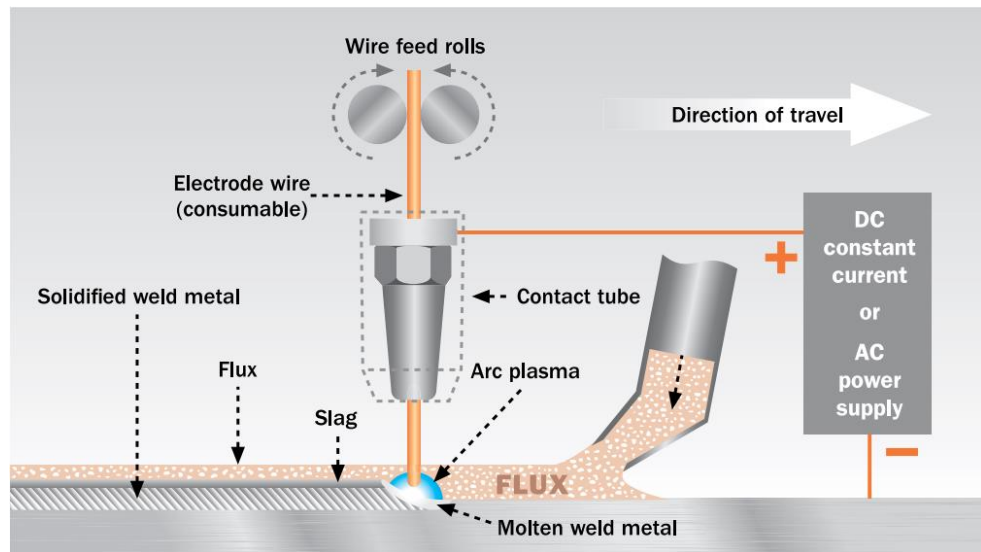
Operation of Single-wire Submerged arc welding [10]
